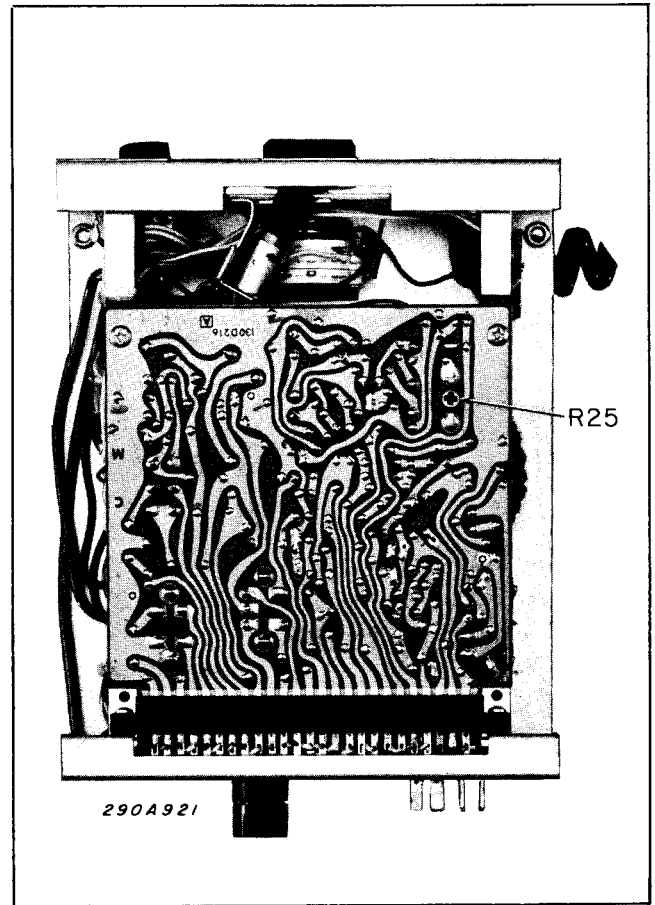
PA 150 Top View, Circuit Board Installed.
